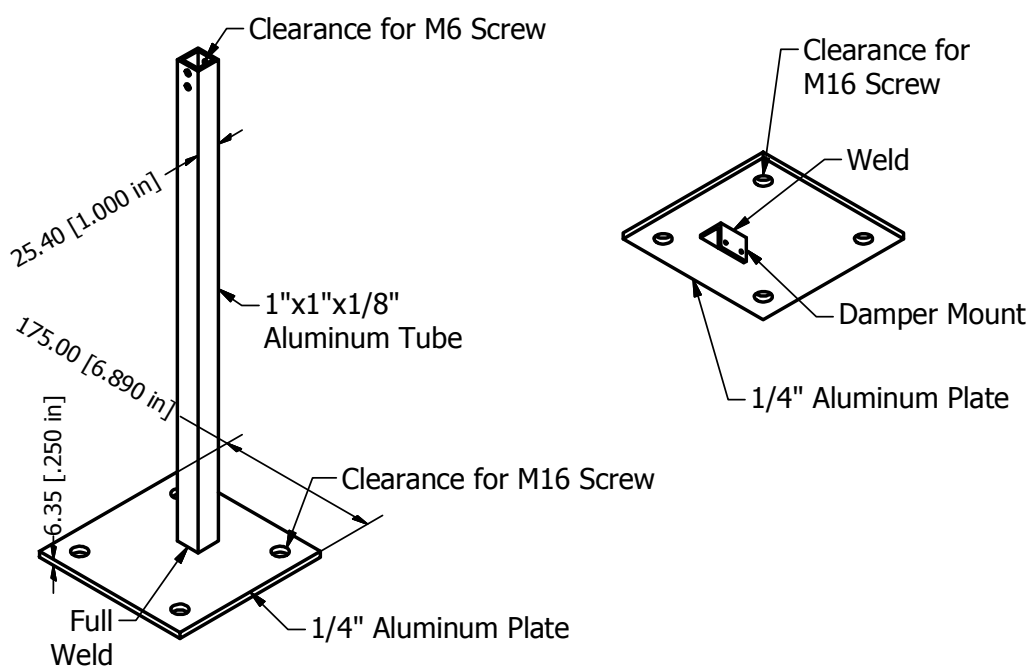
Isometric views of the interior brace (L) and damper mount (R) used for control of the specimen.
